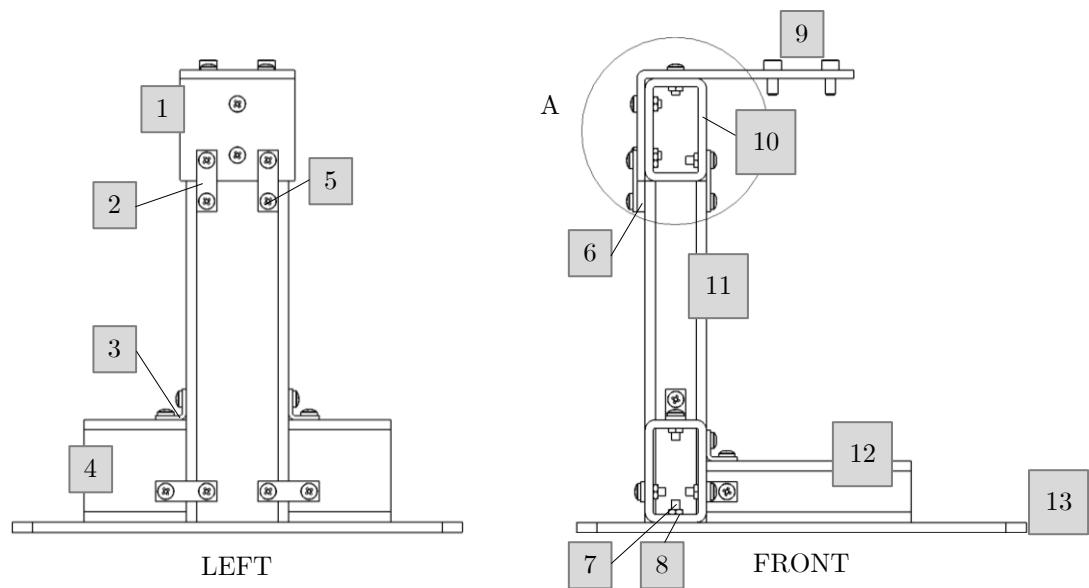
Select cardinal views of assembled motor and machine base assembly
